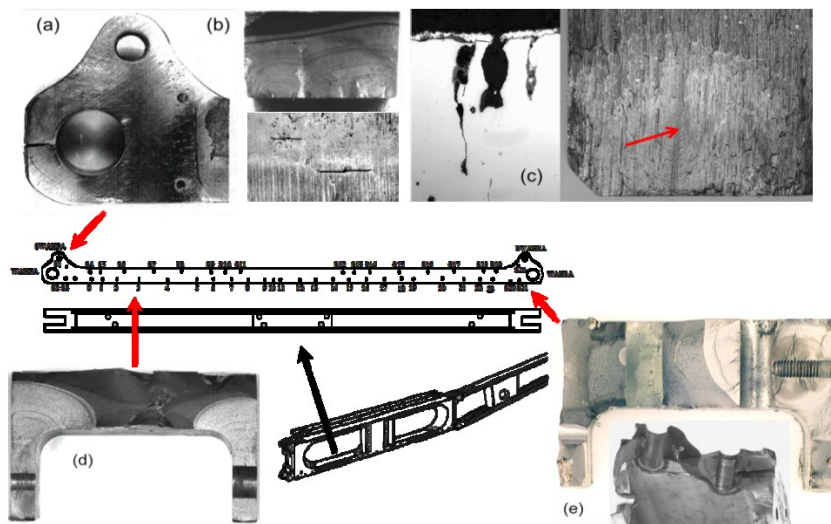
Cracking observed in centre-section spar booms (a) lug failure (b) cracking from corrosion pits in lug bore (c) cracking initiating at a forging/intermetallic (d) cracks from flange holes (e) complex crack configurations involving bolt holes and near-intersecting, corroded screw holes.
